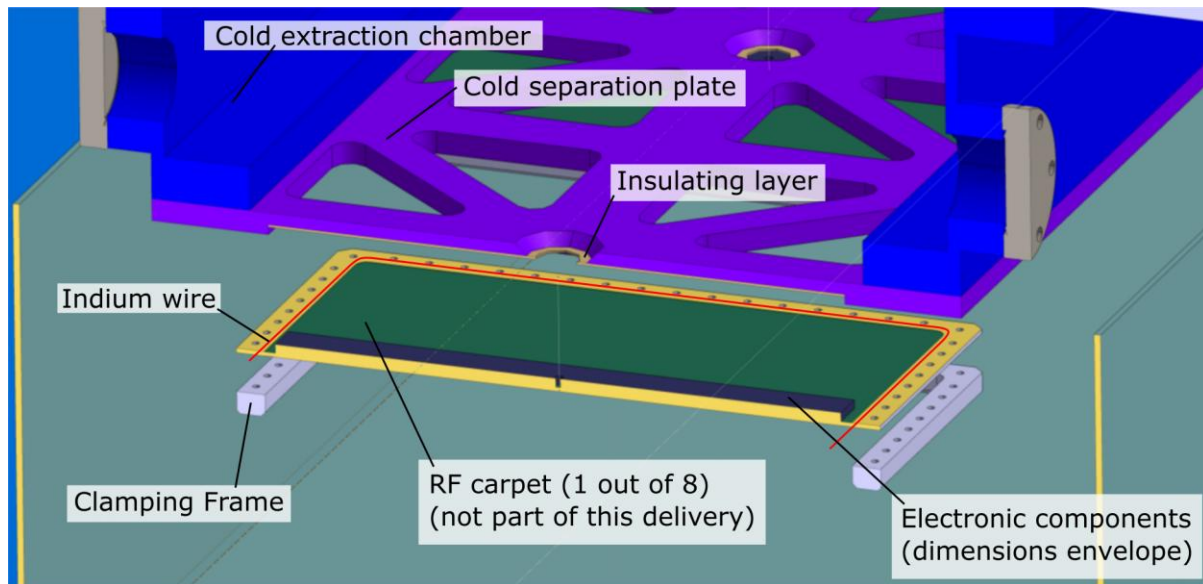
Assembly of cold separation plate, cold extraction chamber and RF carpet
